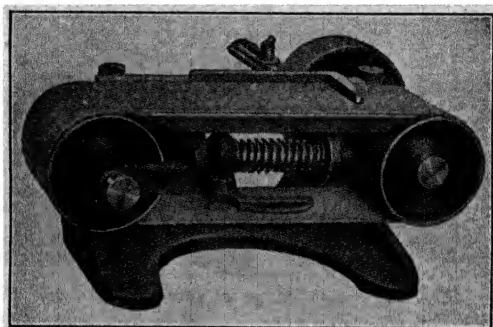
Belt grinder for rough grinding. (Leitz.)
